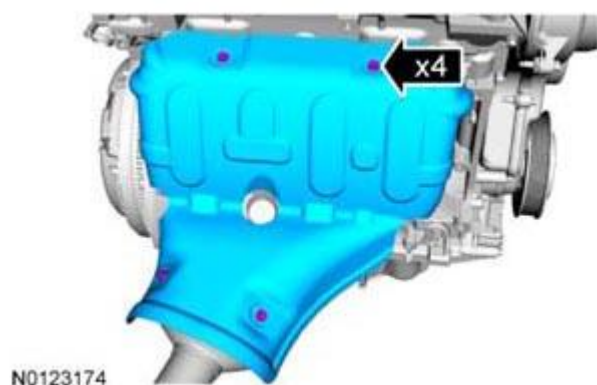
Locating Bolts And Catalytic Converter Heat Shield
